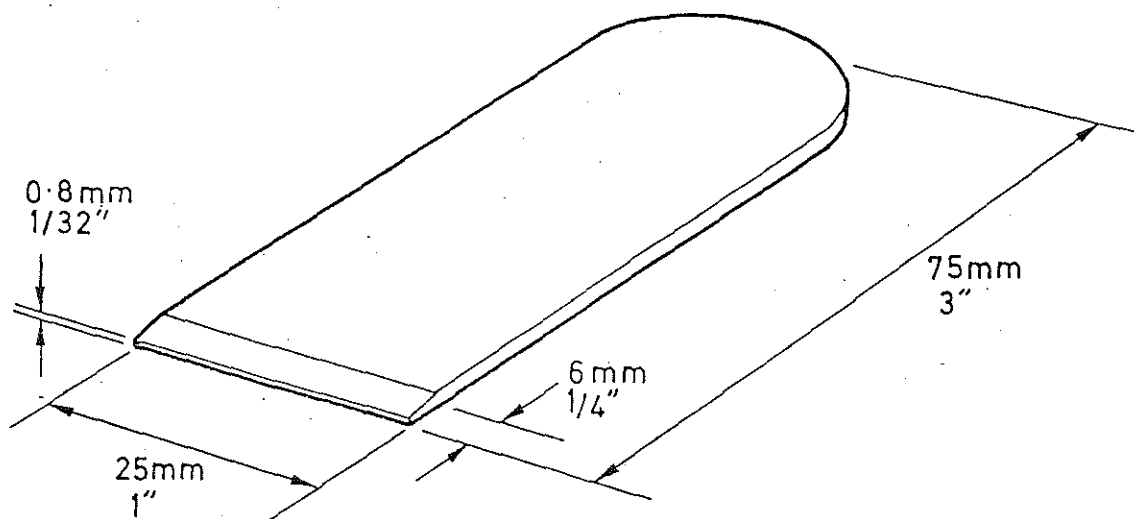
FIG (b) SUGGESTED CONNECTOR REMOVER TOOL
